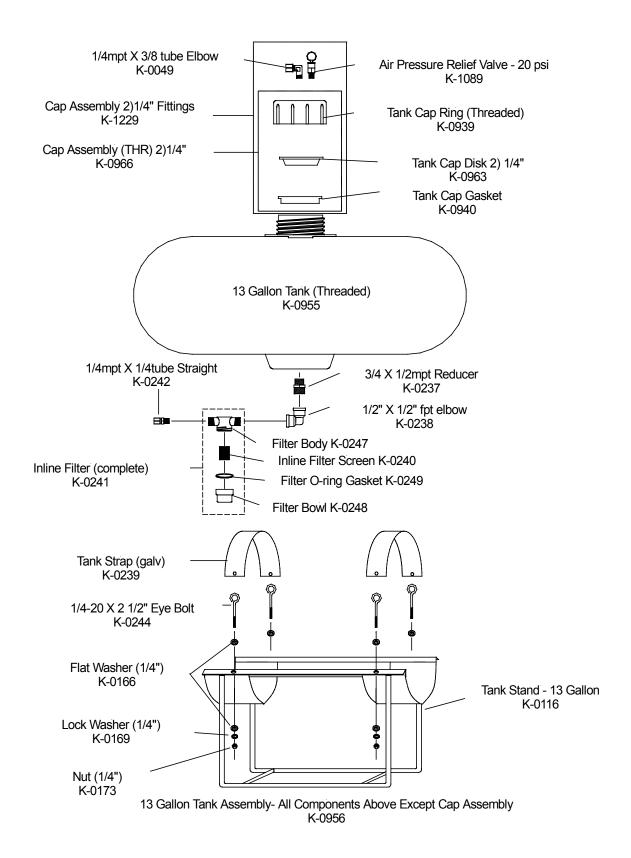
Trac Master 13 Gallon Tank Assembly
